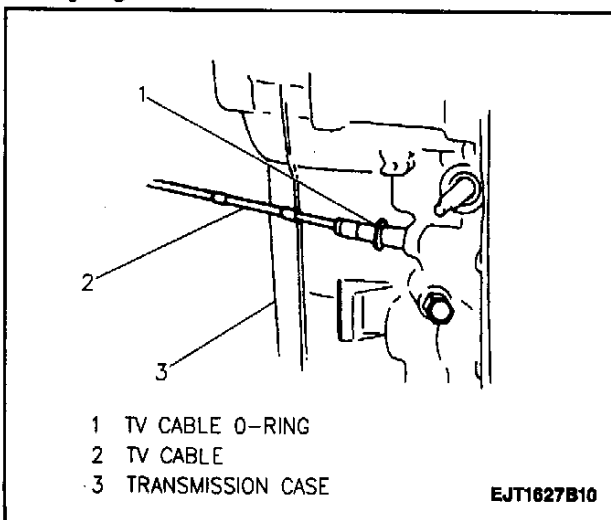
TV Cable and O-Ring (03-72LE, 4-Speed)
